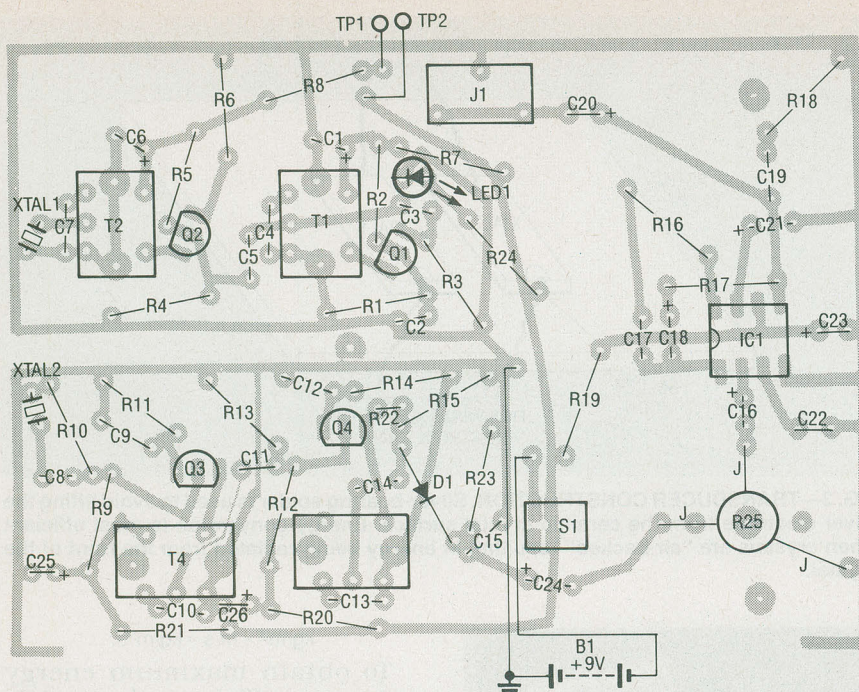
PARTS PLACEMENT. Mount and solder all components as shown here.
